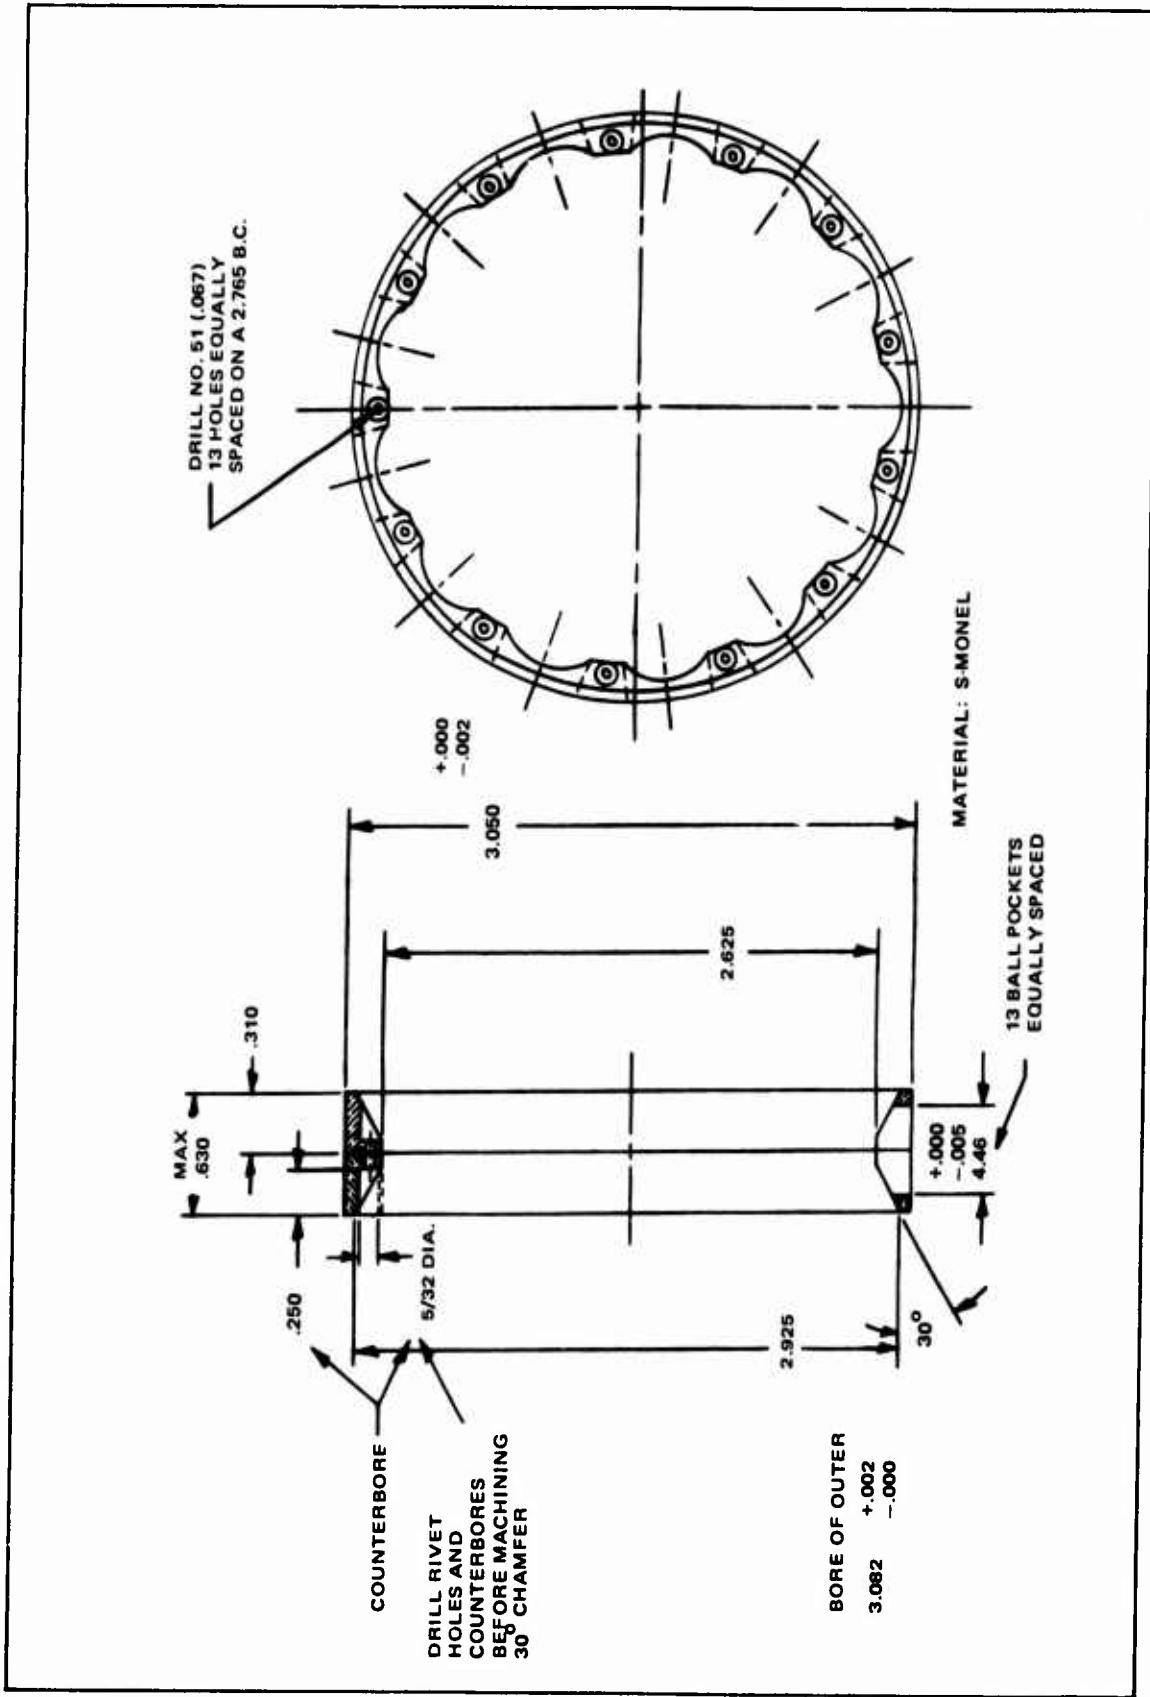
Machined Outer-Land-Riding S-Monel Cage.
